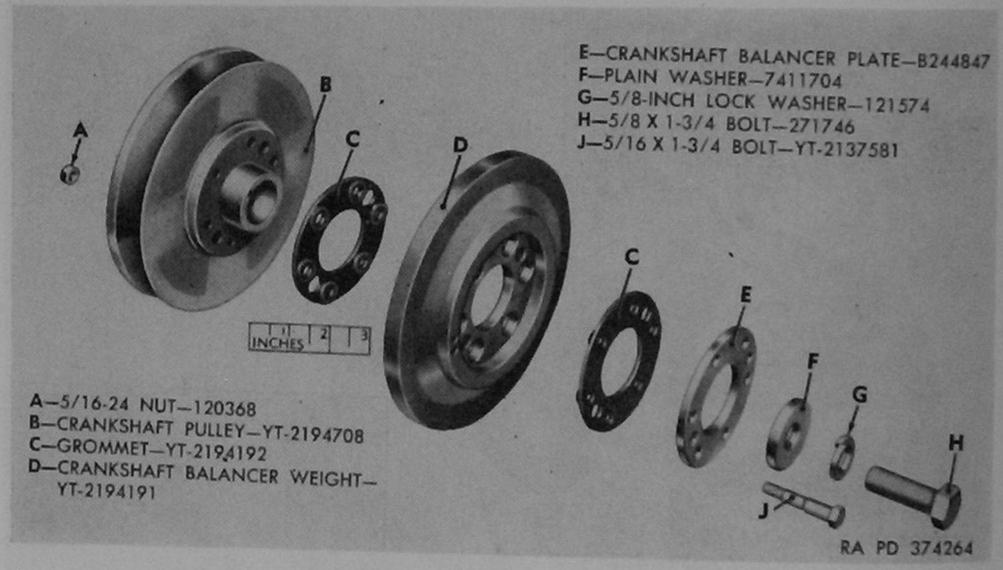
Crankshaft pulley and balancer components—engine assembly 8726920.
